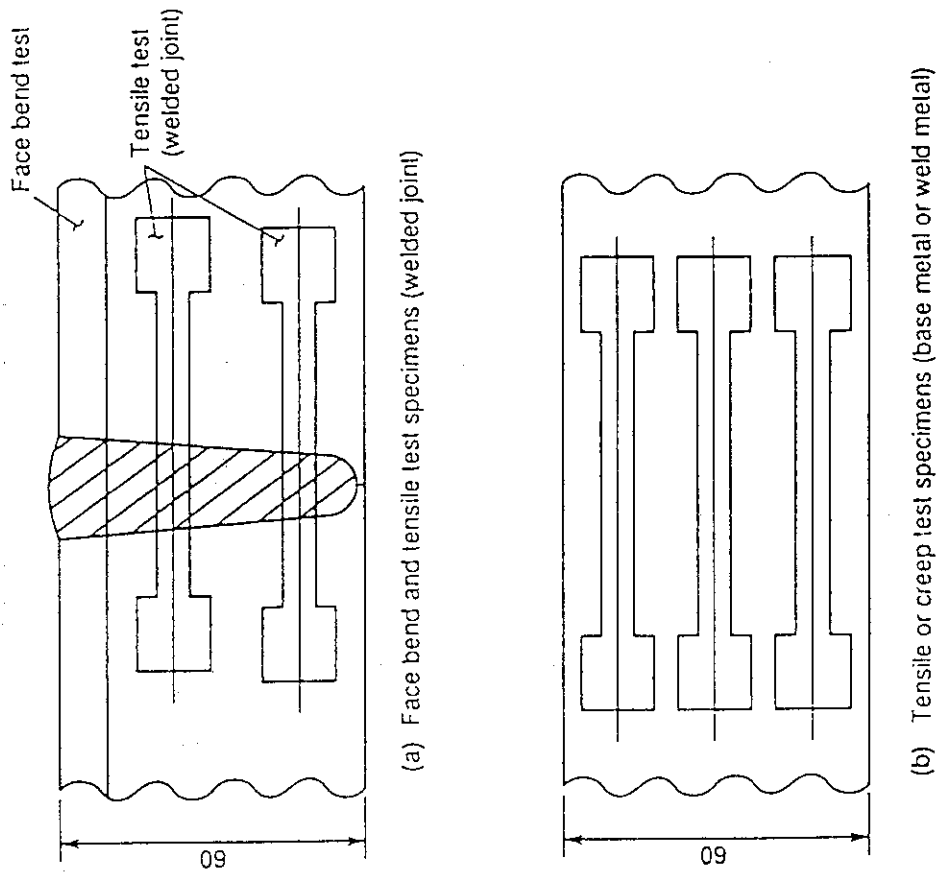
(b) Sampling location of test specimens (plate thickness : 60mm)
